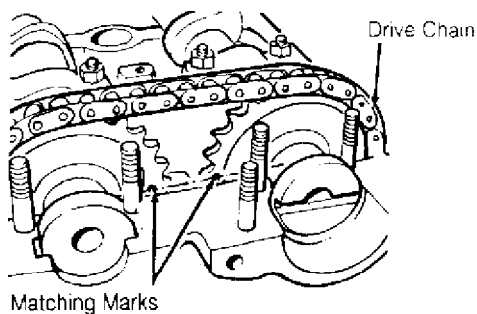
Aligning Camshaft Gears & Drive Chain (16-Valve)
